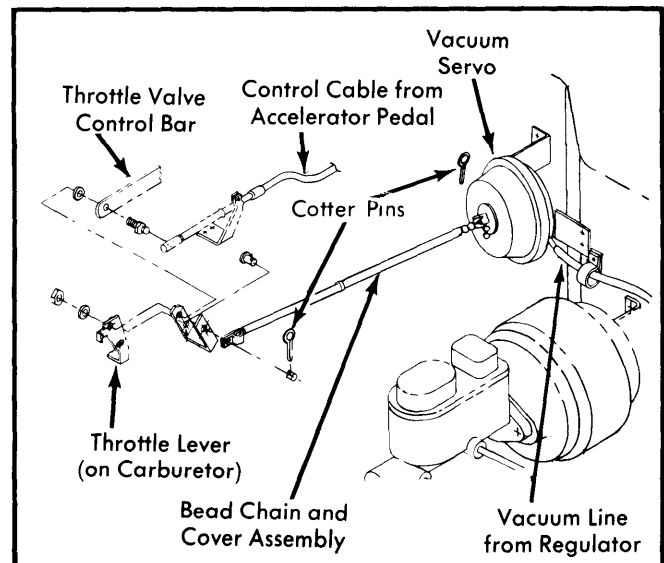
IHC Auto-Cruise Vacuum-to-Throttle Linkage
